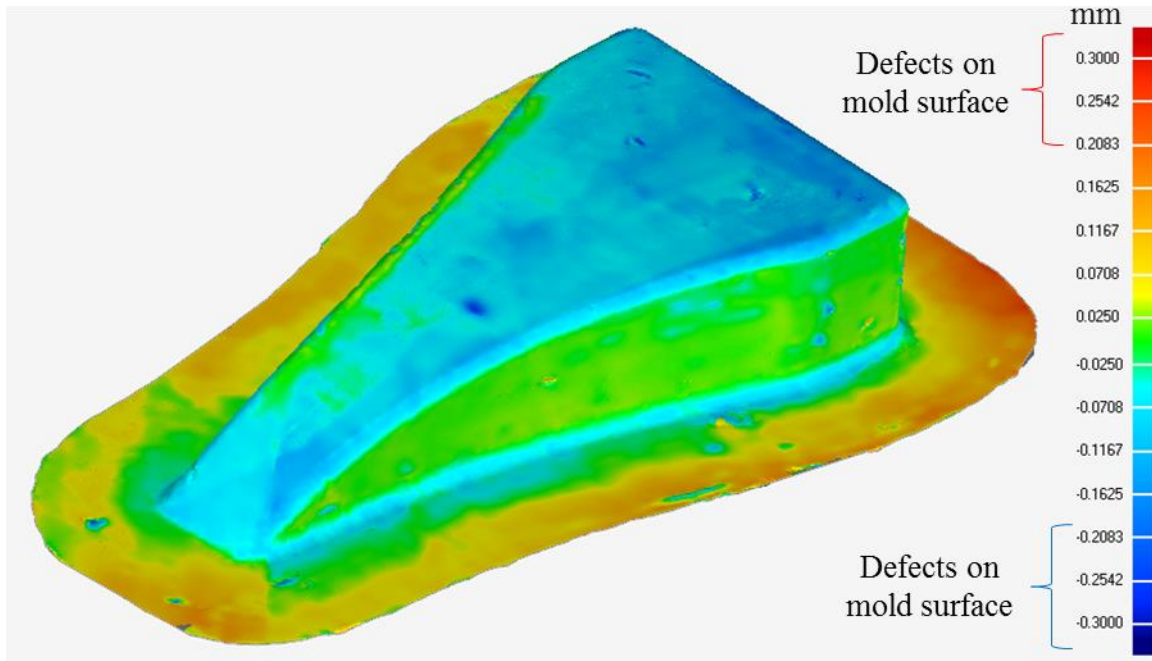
Surface dimensional deviations after using a printed tool in an autoclave manufacturing cycle.
